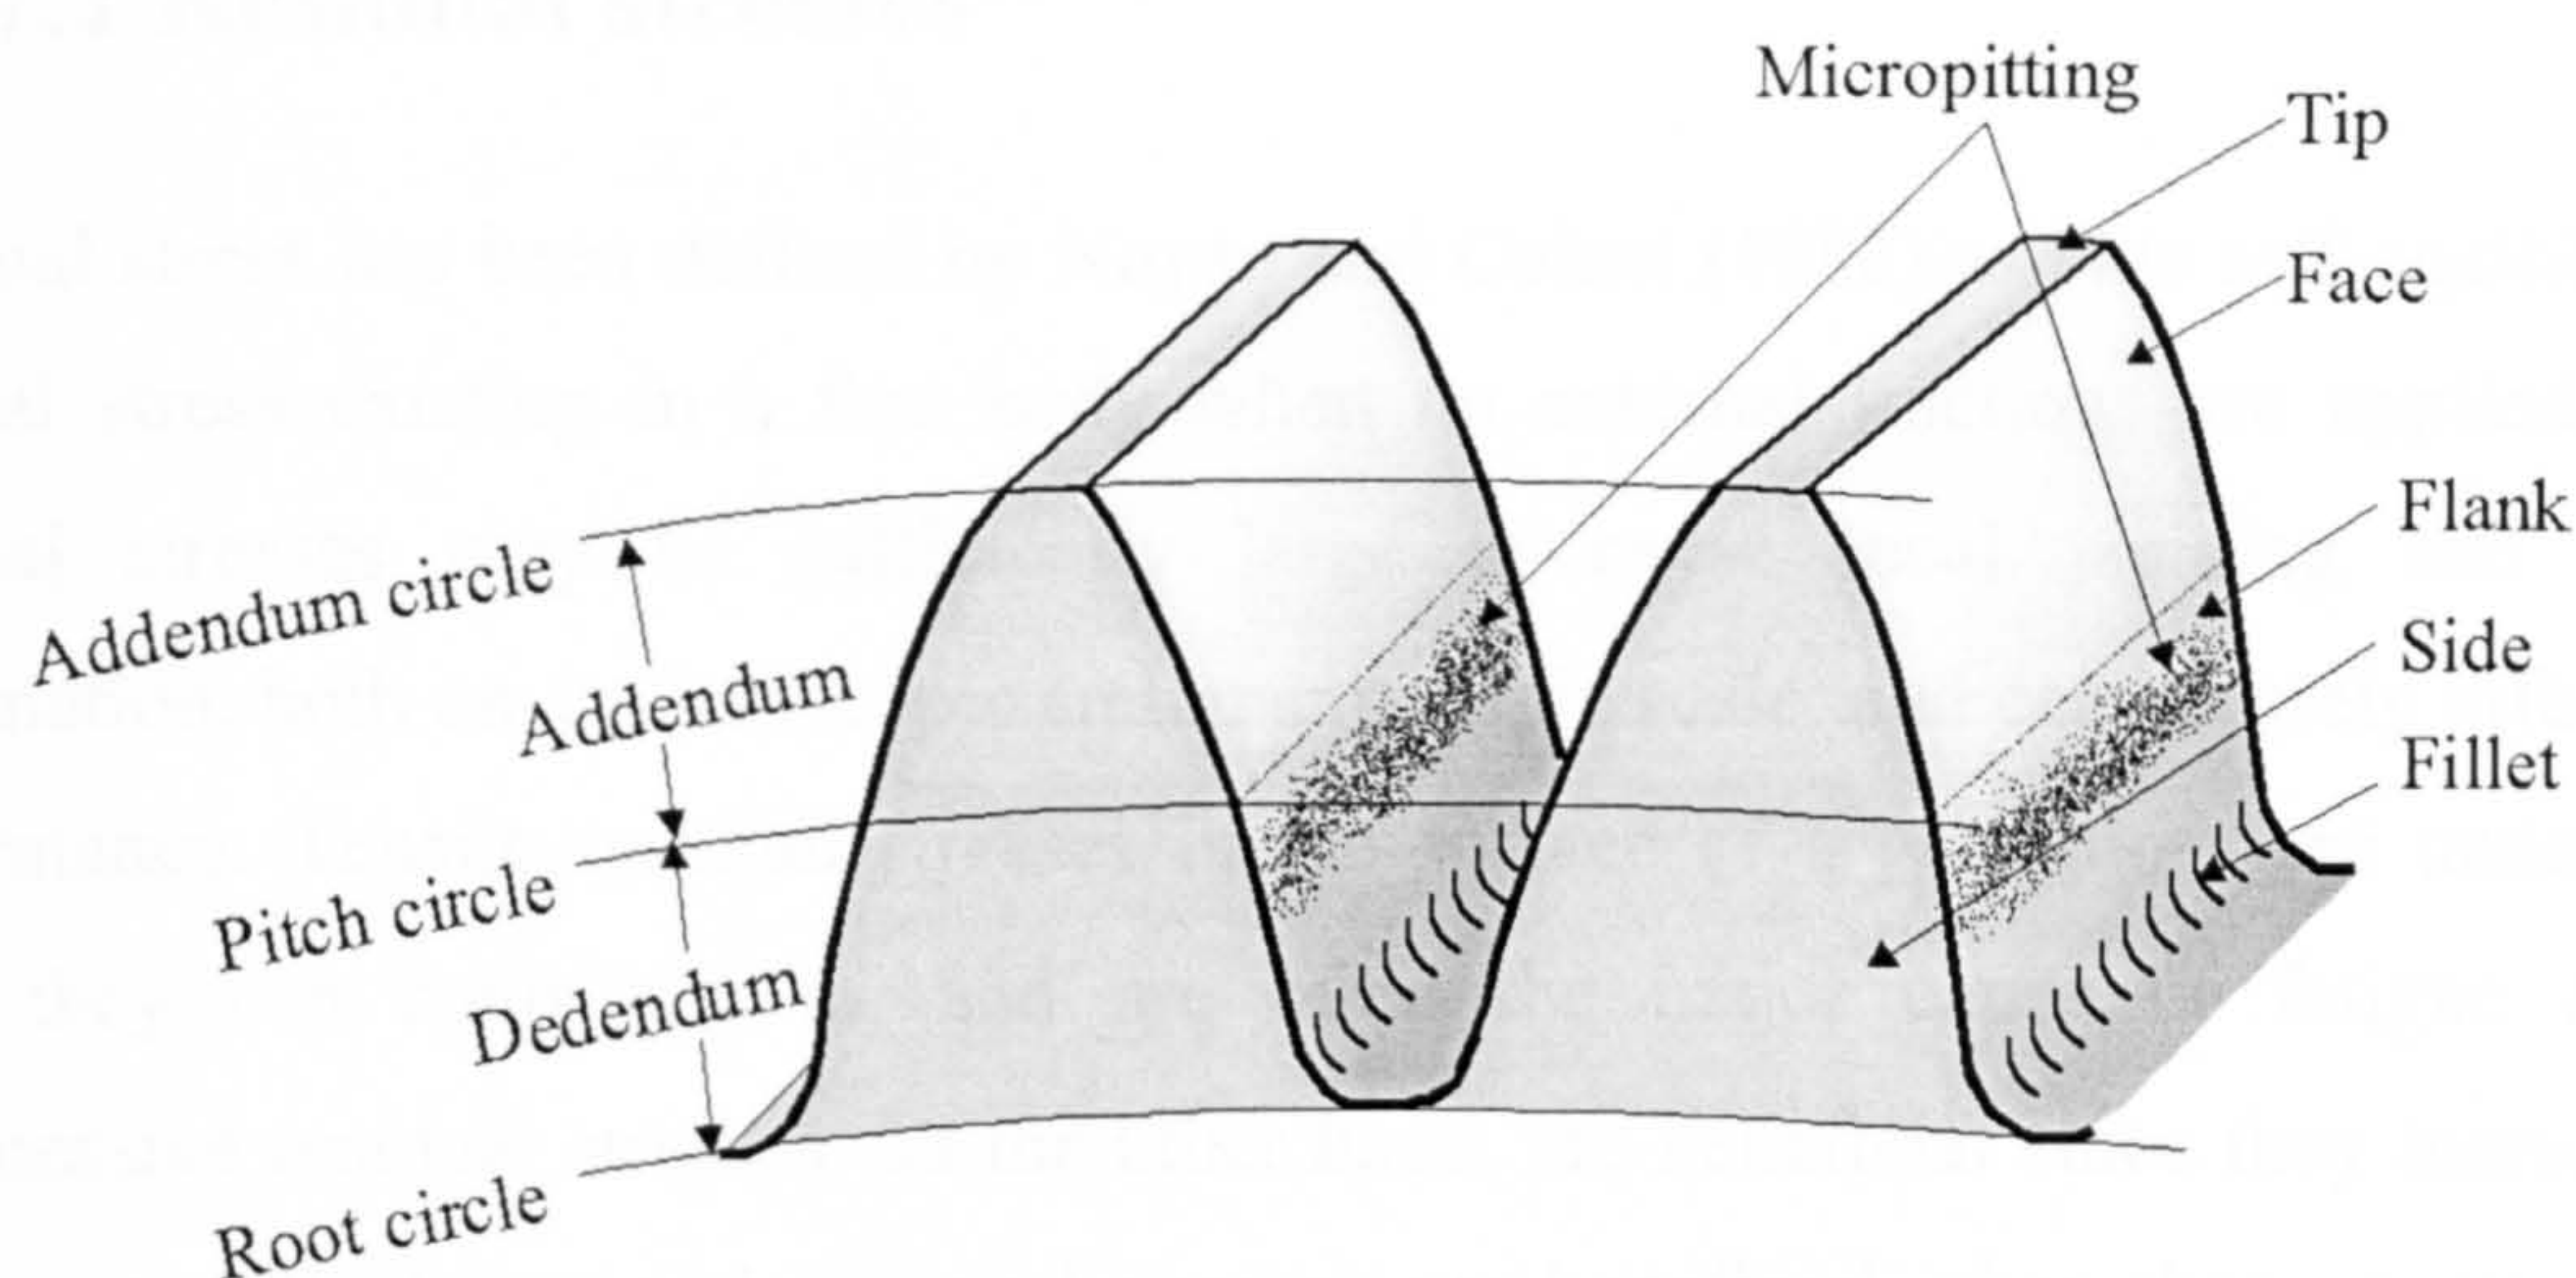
Geometric characteristics of spur gears; micropitting initiates in the dedendum section of the driving gear.
